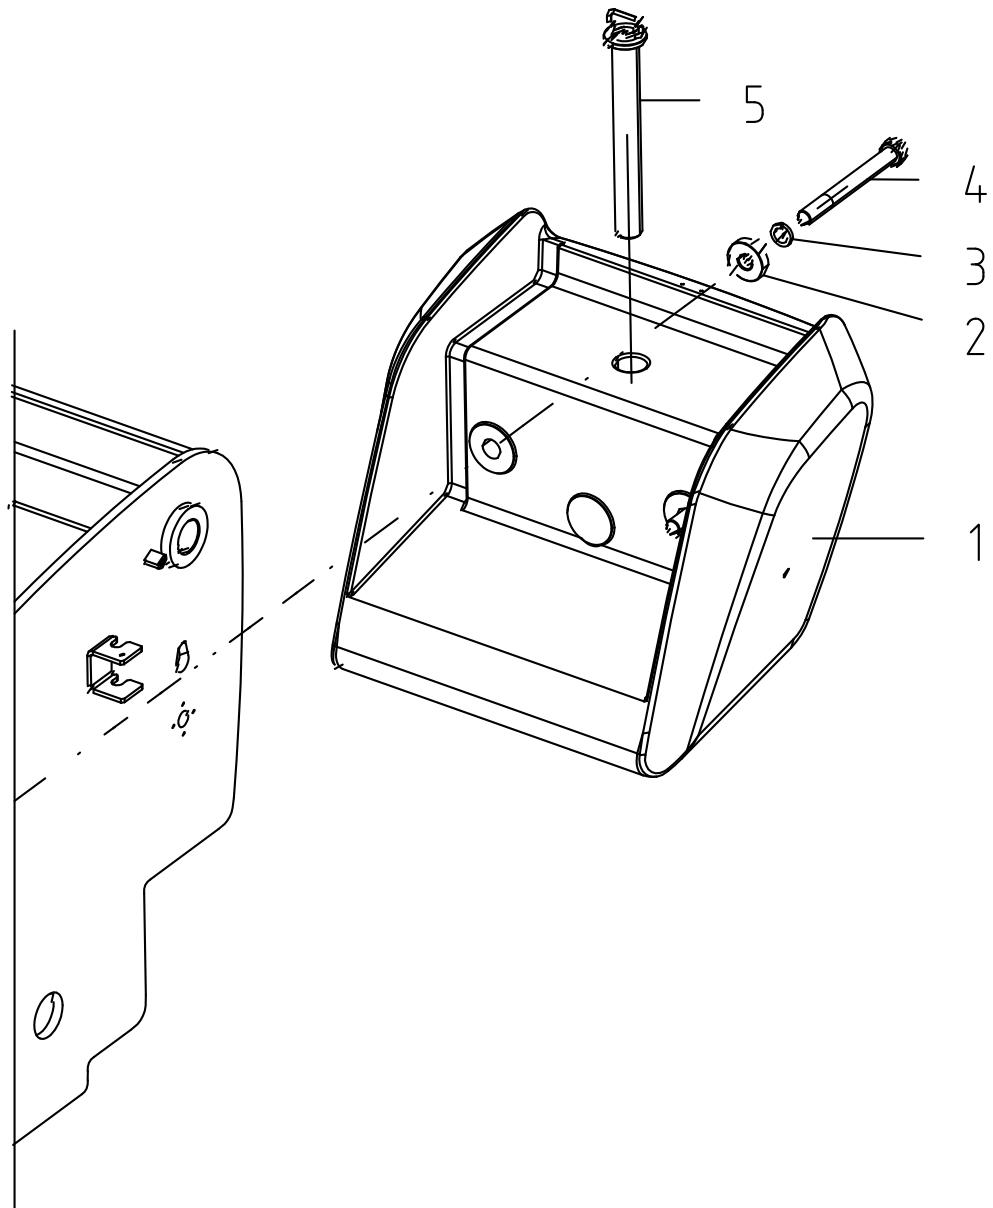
Counterweight Assembly (T35-100XHYG)
